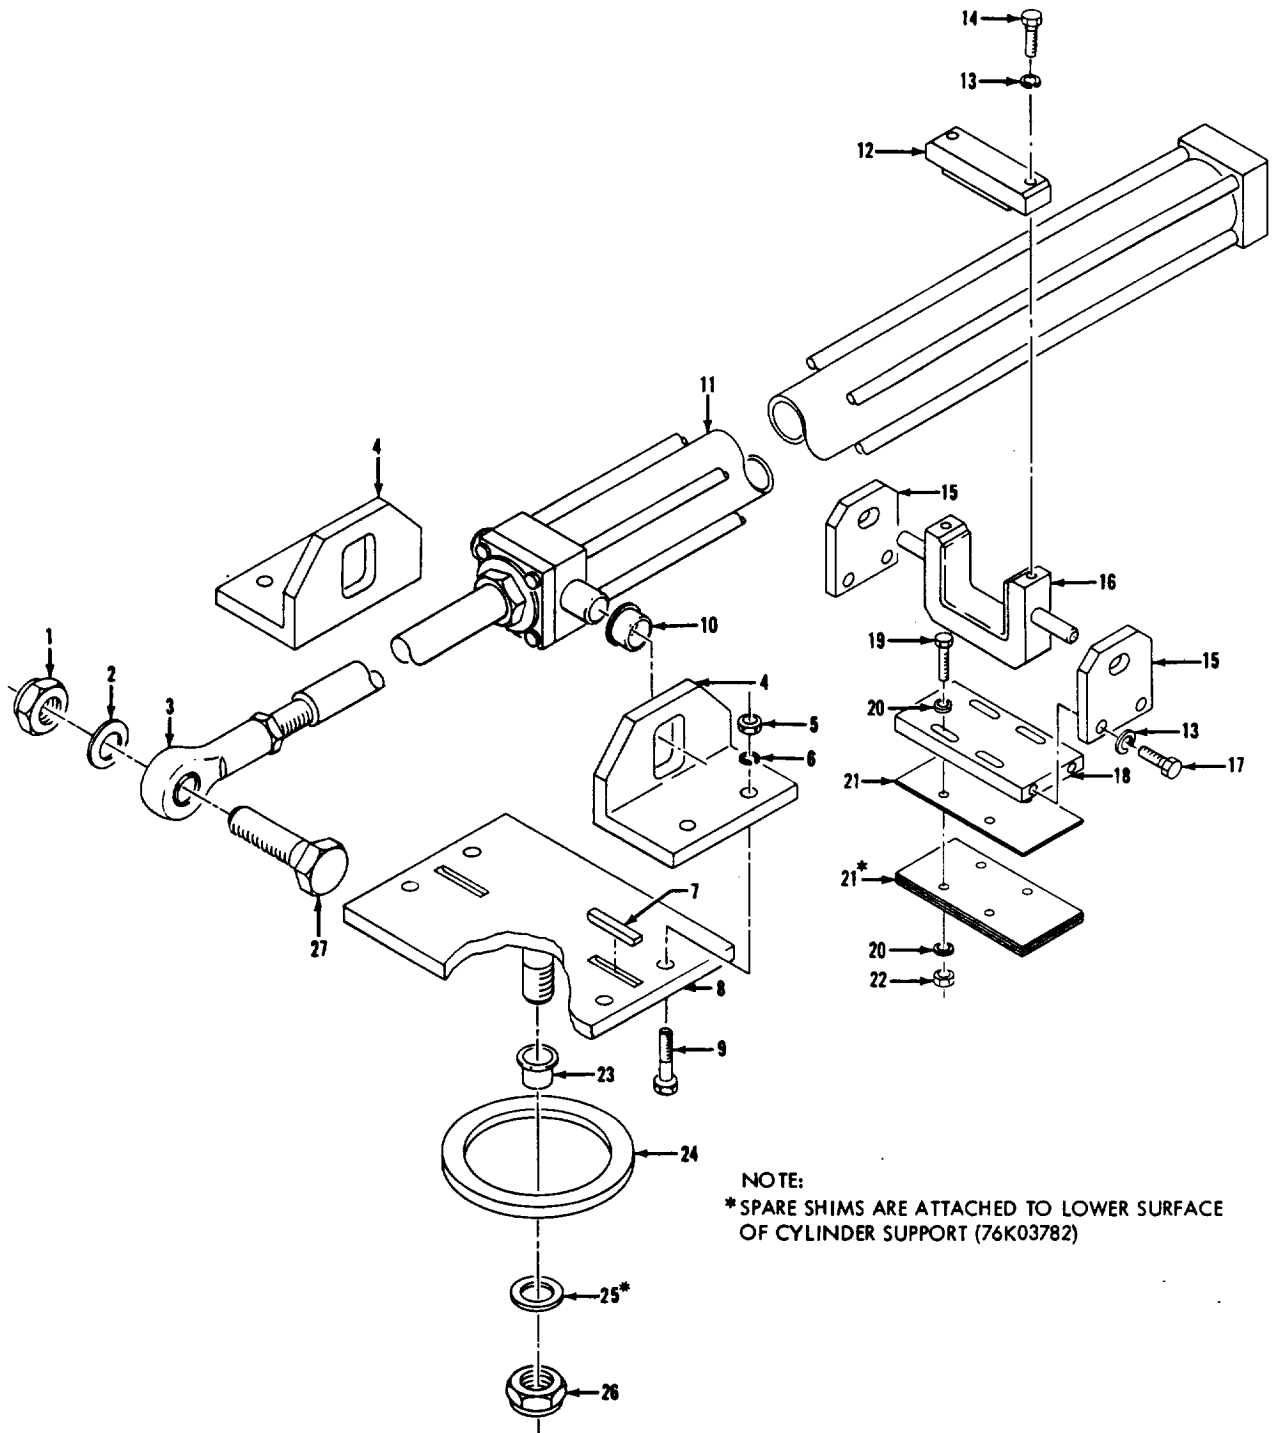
Platform Extend Cylinder Mount Assembly (Sheet 1 of 2)
